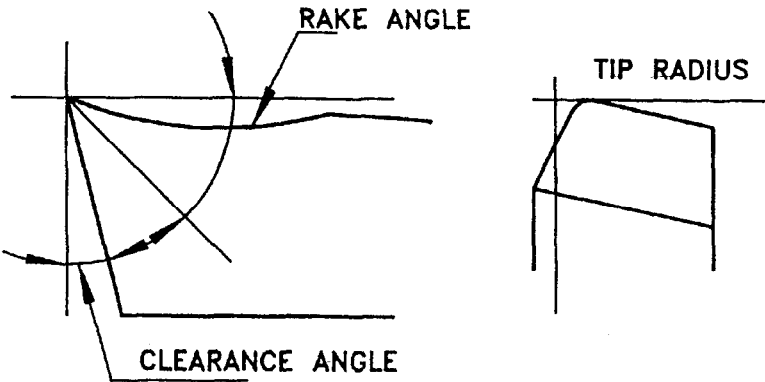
DETAILS OF TOOL PARAMETERS USED FOR TURNING
